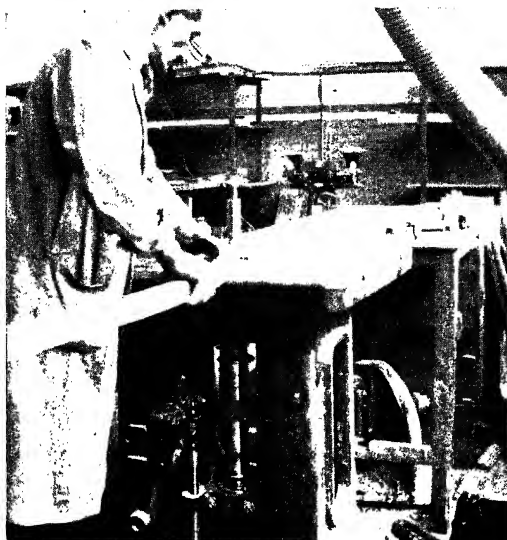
SPINDLING BEND WITH FRENCH SPINDLE HEAD.
